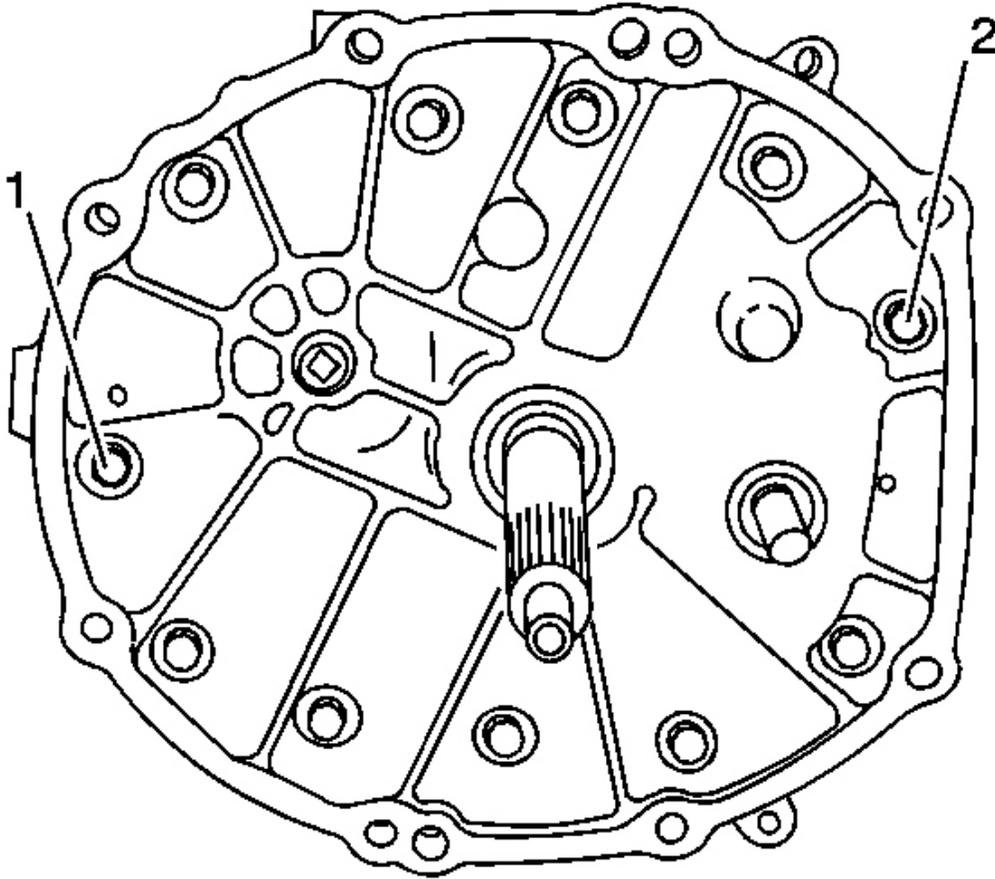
Installing/Removing Two Adapter Plate Bolts
